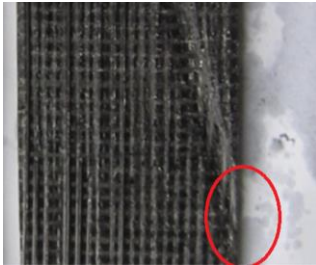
Splash-induced damage on the surface of a CFRP workpiece after AWJM
